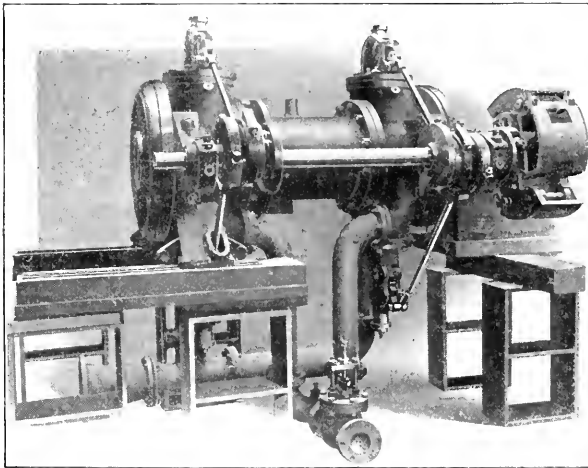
CYLINDER AND HEADS, BEFORE COVERED BY LAGGING AND VALVE-GEAR
